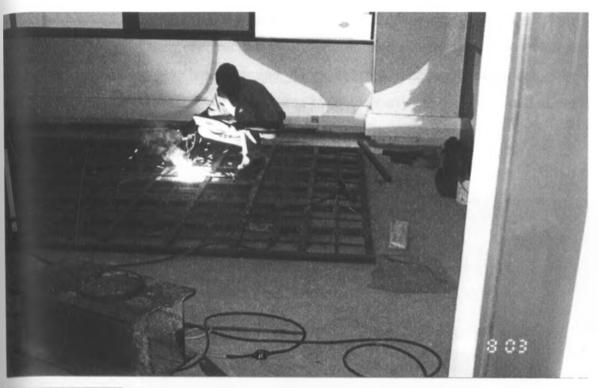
WELDING WITHOUT COMPLETE PROTECTION GEAR Source, field 2003
